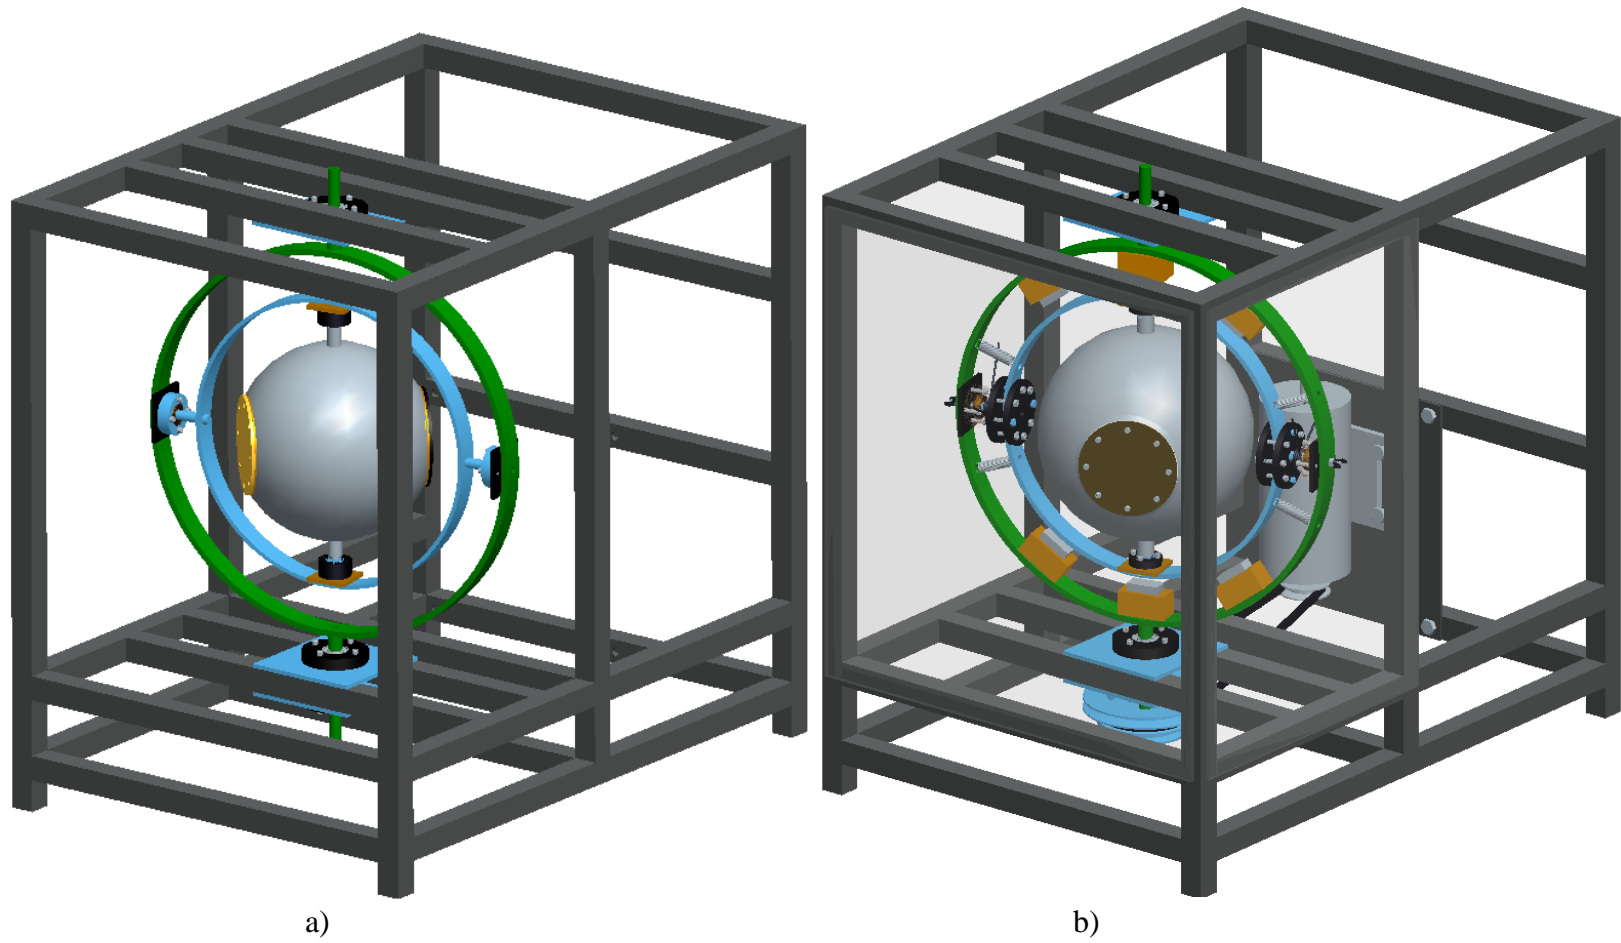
3D CAD Models of (a) Original setup at OSU and (b) Modified setup using Pro-E
